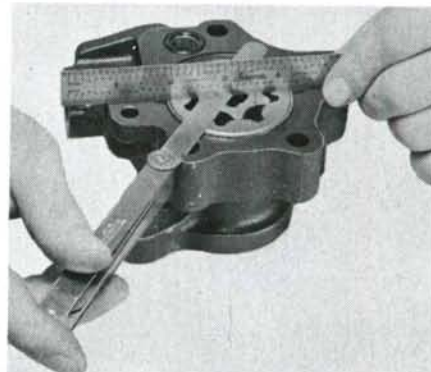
Measuring rotor end clearance with straight edge and feeler gage. Maximum allowable clearance is 0.0025.
